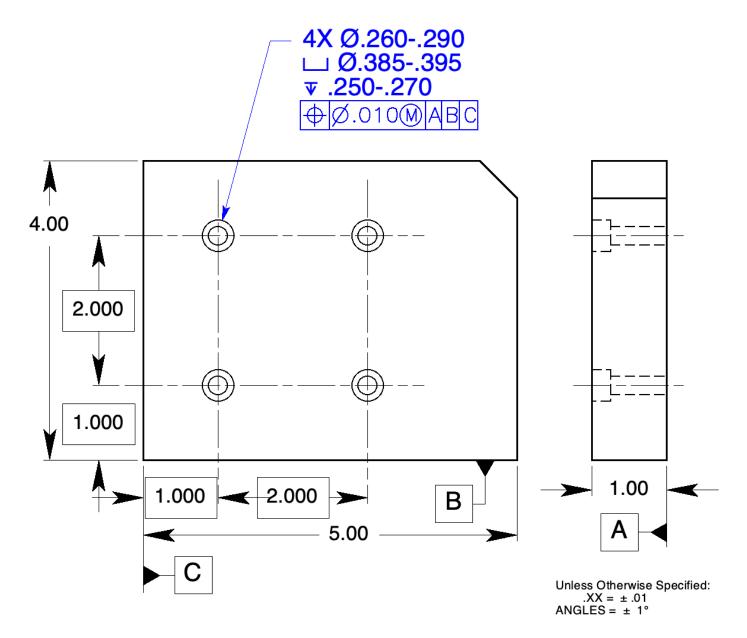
Controlling counterbores with positional tolerancing: Probs. 24 and 25.
